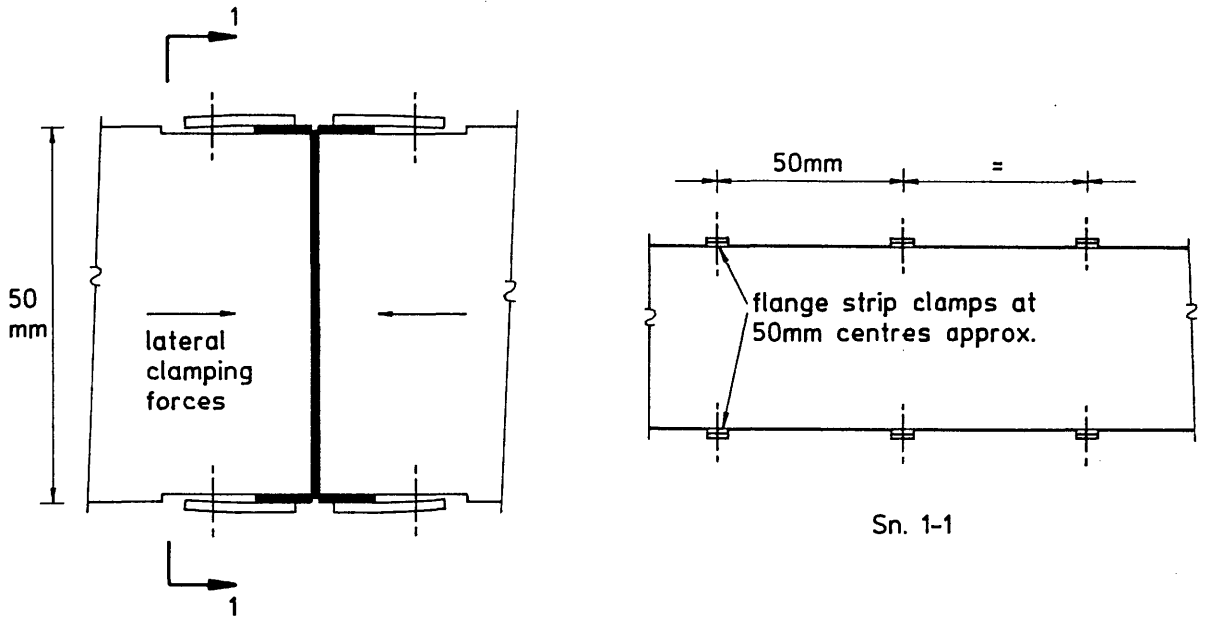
Clamped web and flange strips prior to TIG welding to form I-beam section. (Flange and web strips of beam shaded)
